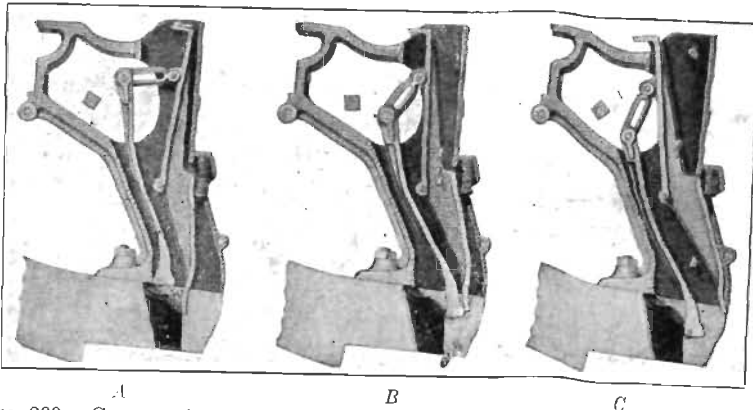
Cross-sectional view of check-row planter boot, showing action of the valves: *A*, valves closed with kernels of corn in each; *B*, valves open showing lower valve ejecting corn into the soil and the corn dropping from the upper valve to be caught by the lower valve; *C*, valves locked open for drilling.
